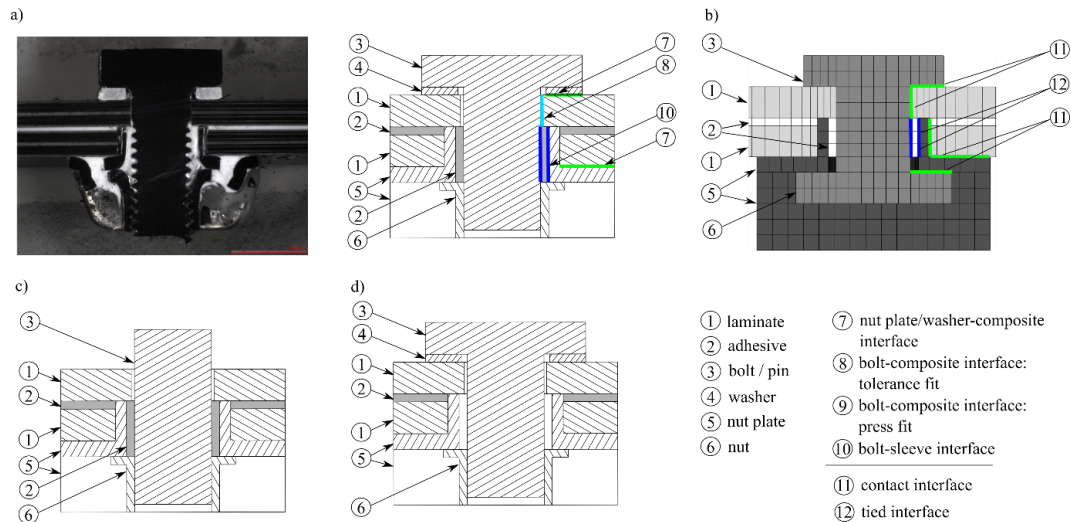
Crack arresting features a) rivetless nut plate joint b) numerical model of rivetless nut plate joint c) pin configuration d) bolt configuration
